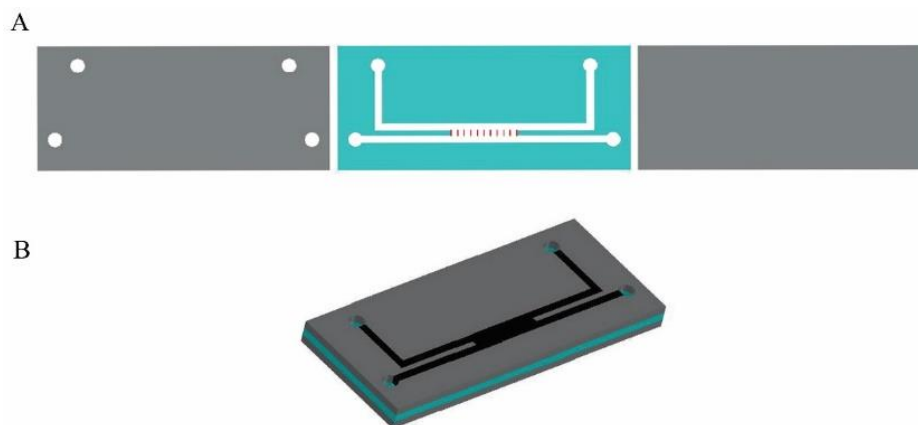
Assembly Technique 1. The double-sided adhesive was utilized on both sides of the middle layer for assembly of CMD. (A) Individual layers of CMD. (B) Three-layered CMD.
